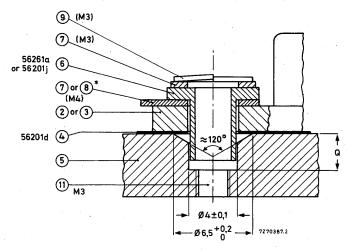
Assembly (partial) for Fig. 10 - tapped holes.
